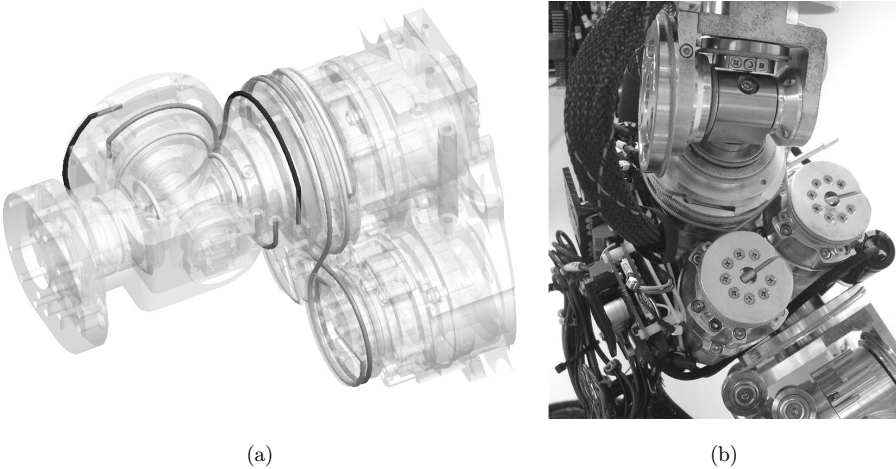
The shoulder joint. The figure shows a CAD view of the shoulder joint mechanism with a highlight of the cable transmission system (a). The figure also shows a photo of a bottom view of the shoulder joint (b).
